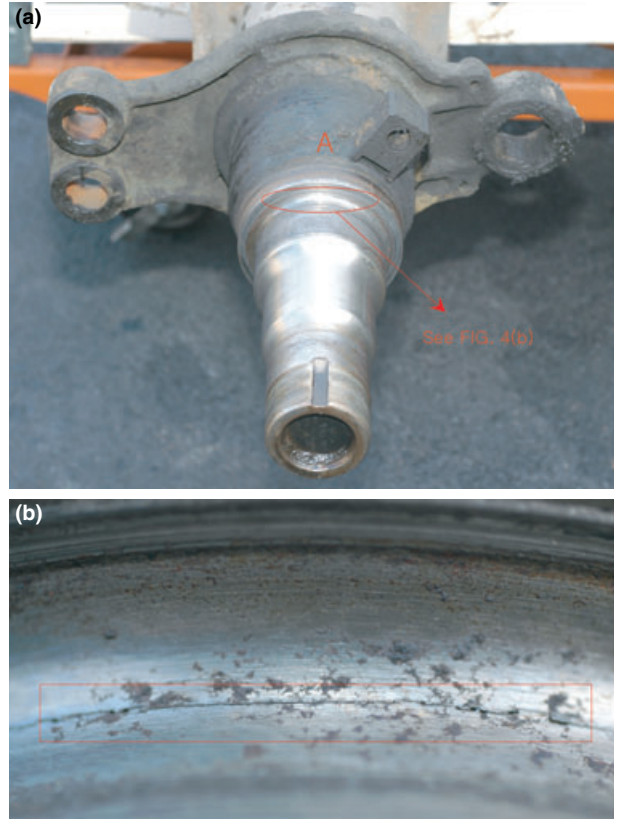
(a) Typical shape of the non-fractured axle which is disassembled from the trailer. Crack is formed on the lower (location A) part of the axle. (b) Magnification of location A of Fig. 4(a). Crack is clearly visible along the circumference of the lower part of the axle.
